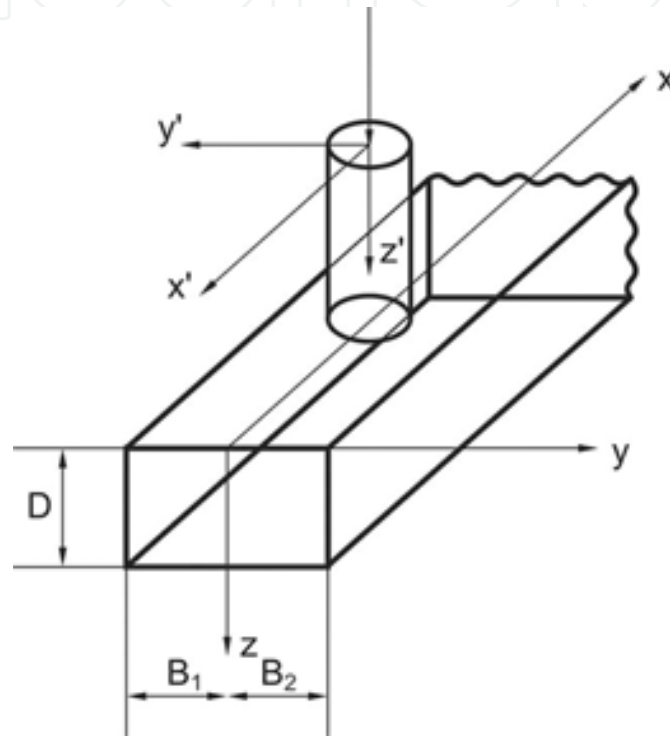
Schematic of heating of a steel sample using welding heat source.
